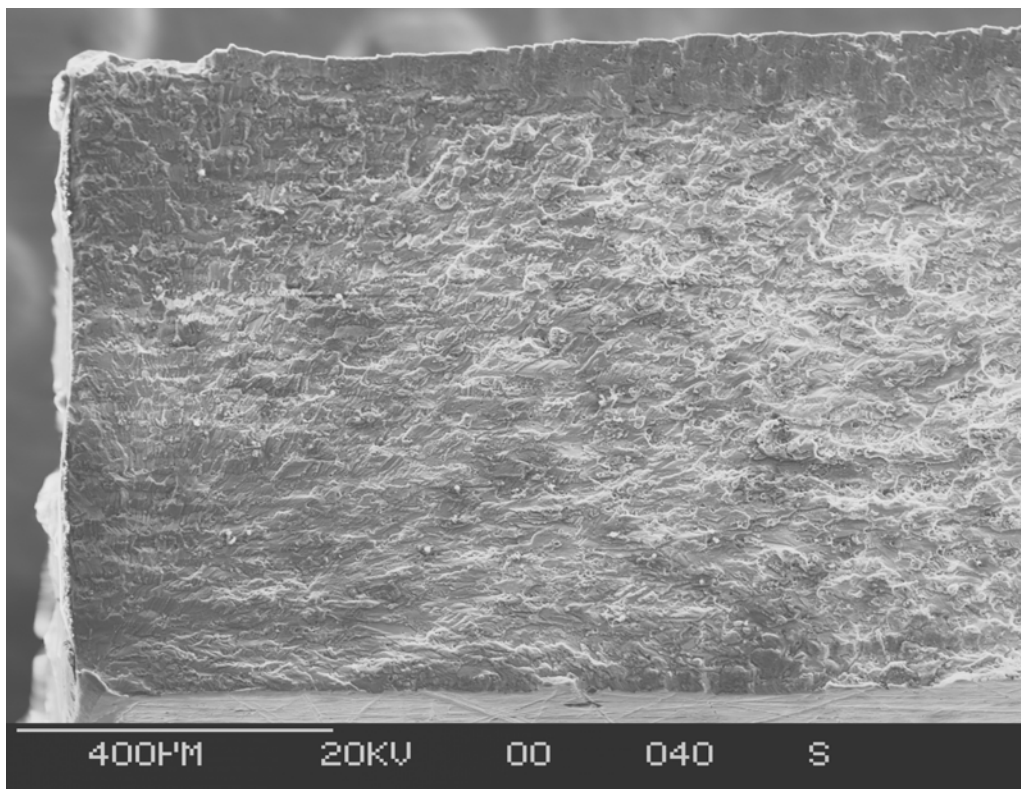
Fatigue Crack on Fracture Surface of Specimen 5854.
